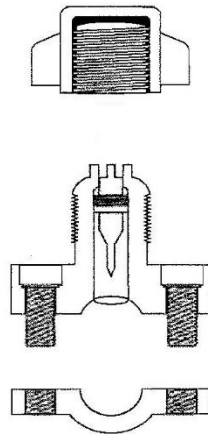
After a hole is pierced in the tubing the cap is removed and the piston is discarded.
